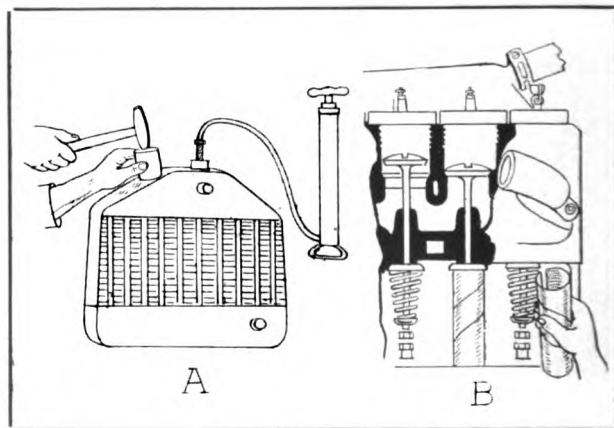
A, Removing Dents from Radiator with Air or Water Pressure; B, Inexpensive Silencing Noisy Valve Stems and Tappets.
